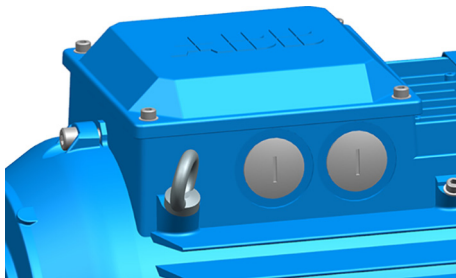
Integrated terminal box for motor size 90-132. Knock-out openings for cable entries.
